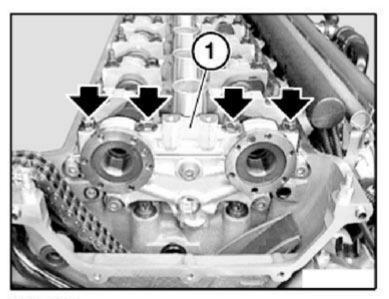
Identifying Thrust Bearing Flange Courtesy of BMW OF NORTH AMERICA, INC.
